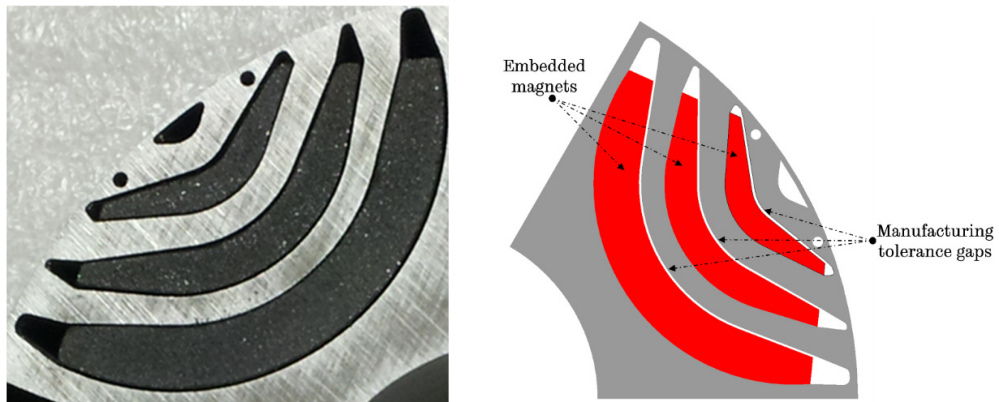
Mechanical tolerances on PMA SynRM rotor.
